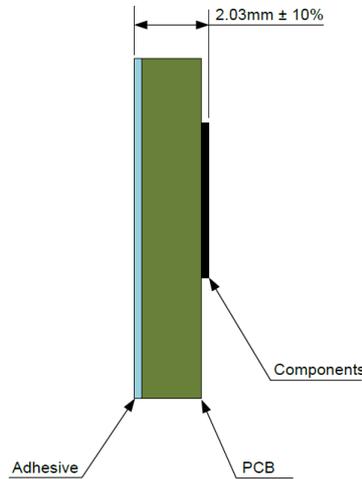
Stack-Up (A) - Thickness: PCB + 3M double sided adhesive
